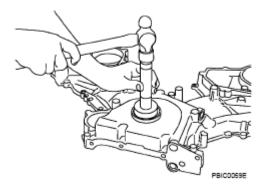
Identifying Oil Seal Courtesy of NISSAN MOTOR CO., U.S.A.
